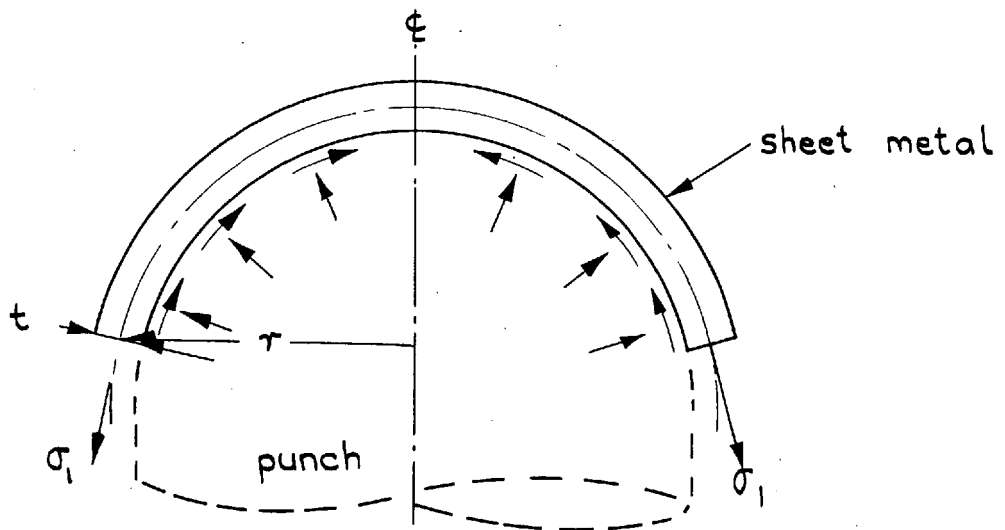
A LARGE ELEMENT OF SHEET METAL IN STRETCH FORMING
